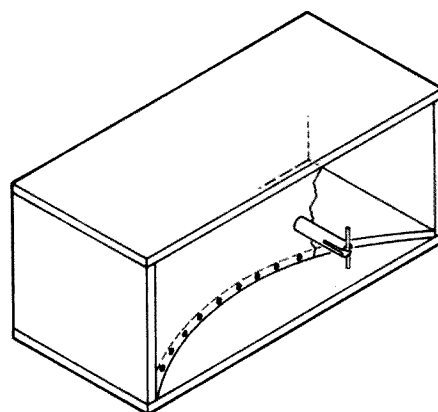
Box construction with cutaway view of the lower surface support rib.
